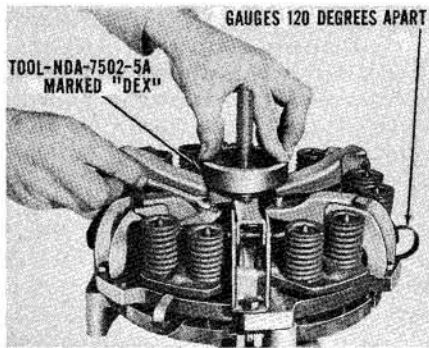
Using adjusting spacers to adjust clutch fingers. Make certain the three adjusting spacers are top side up and are in contact with both clutch discs.
